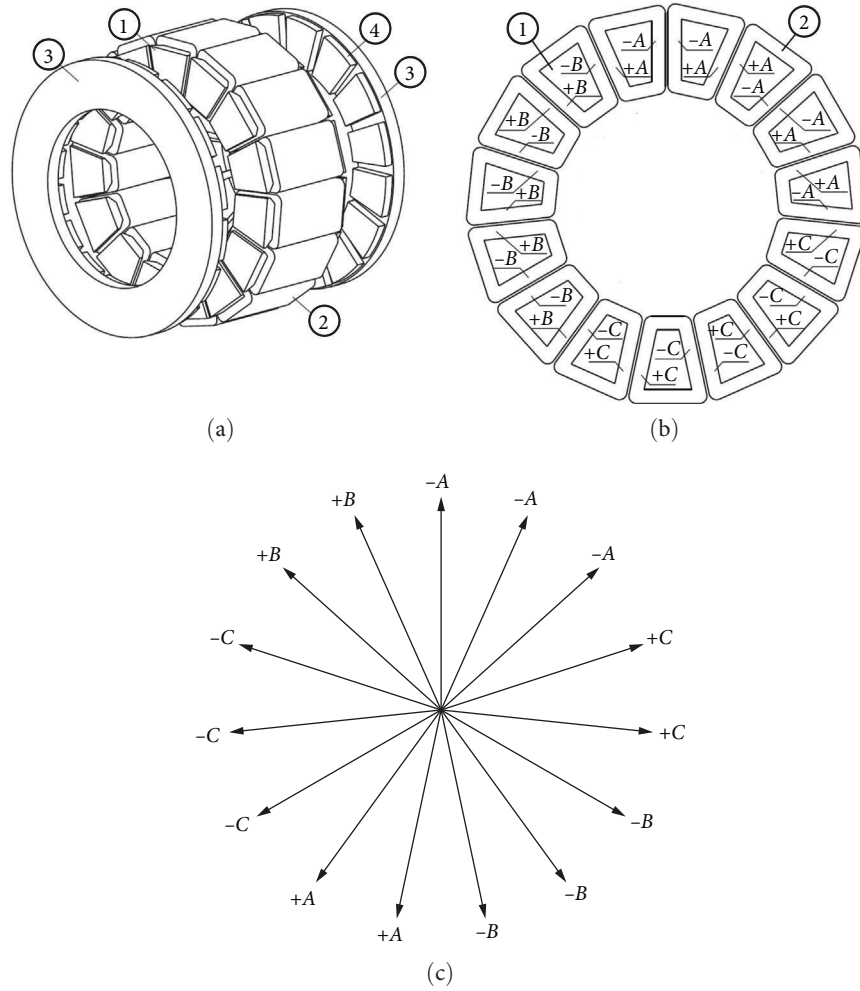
The AFPMSM consists of a stator comprising 15 stator core elements (1) with a bifilar tooth coil winding (2) and two rotor discs (3) with 16 permanent magnets per disc (4). Winding $X \in \{A, B, C\}$ represents a bifilar tooth coil winding comprising windings X_1 and X_2 : (a) 3D-view of the AFPMSM [18], (b) front view of the stator with winding arrangement [18], and (c) voltage phasor graph [18].
